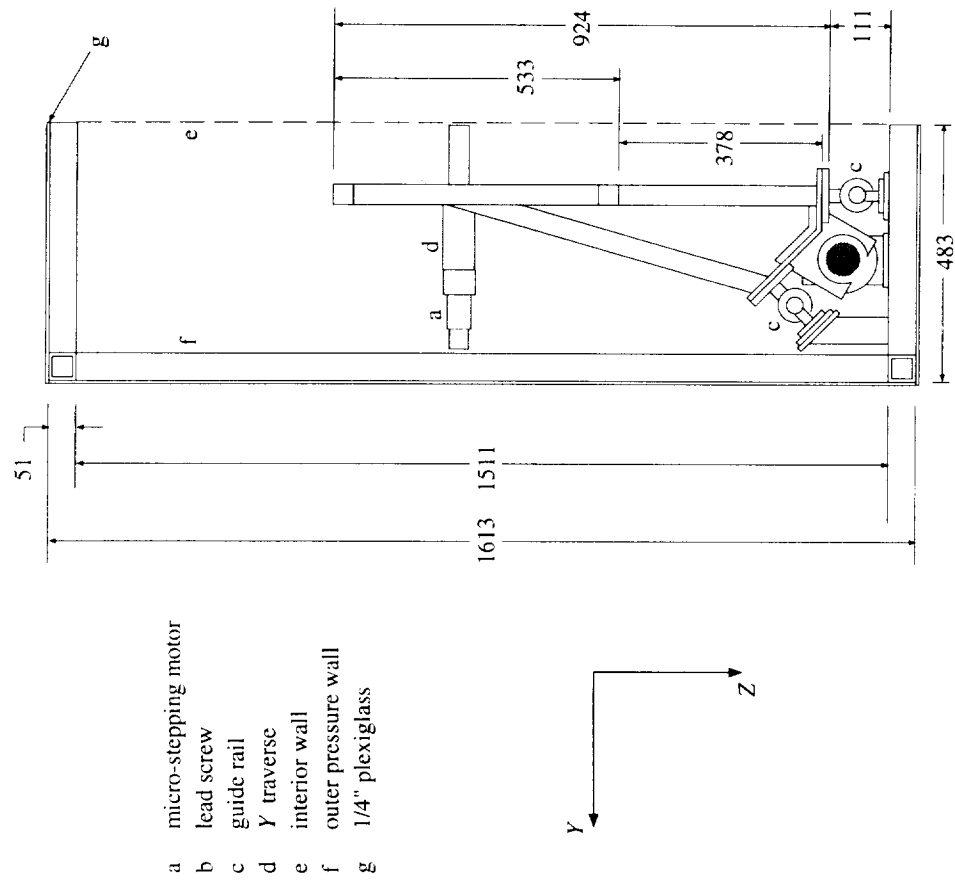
Side view of traverse carriage. All dimensions in millimeters.
